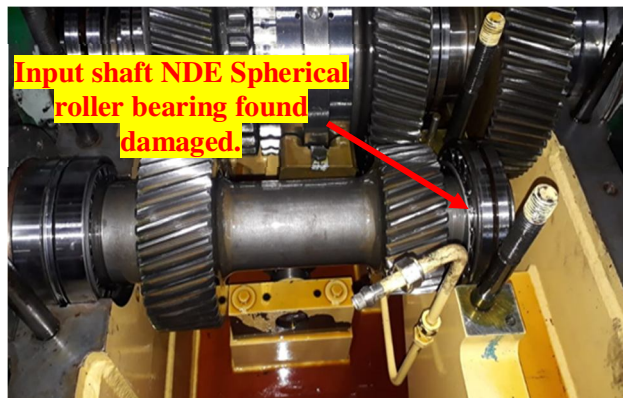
Failed gearbox of stand no 16 Fig.5 Broken cage bar of input shaft bearing of stand no 16-gearbox
